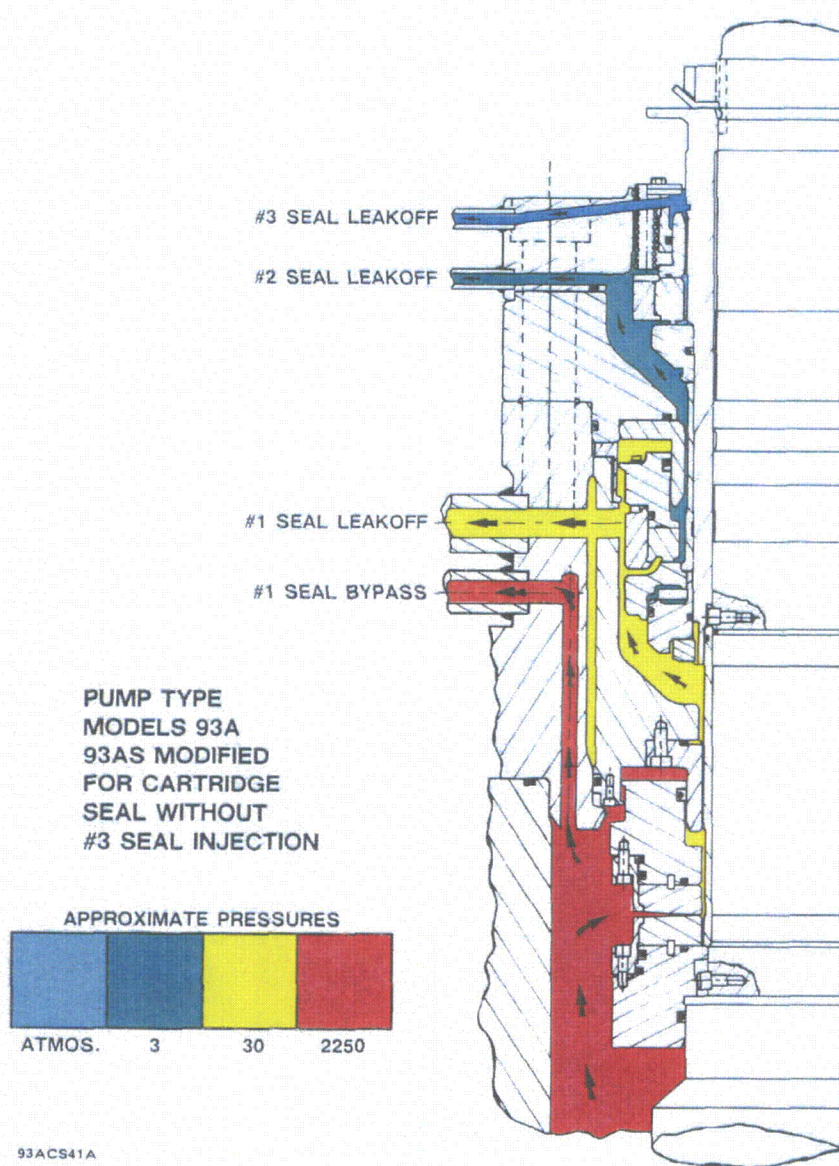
Cut-Away Of RCP Pump Showing Location Of Seal Package
